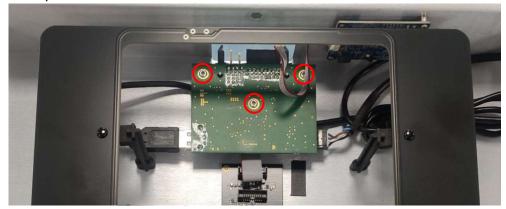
3x (T10 x Torx) retaining screws on Document Tray Backplane PCB
